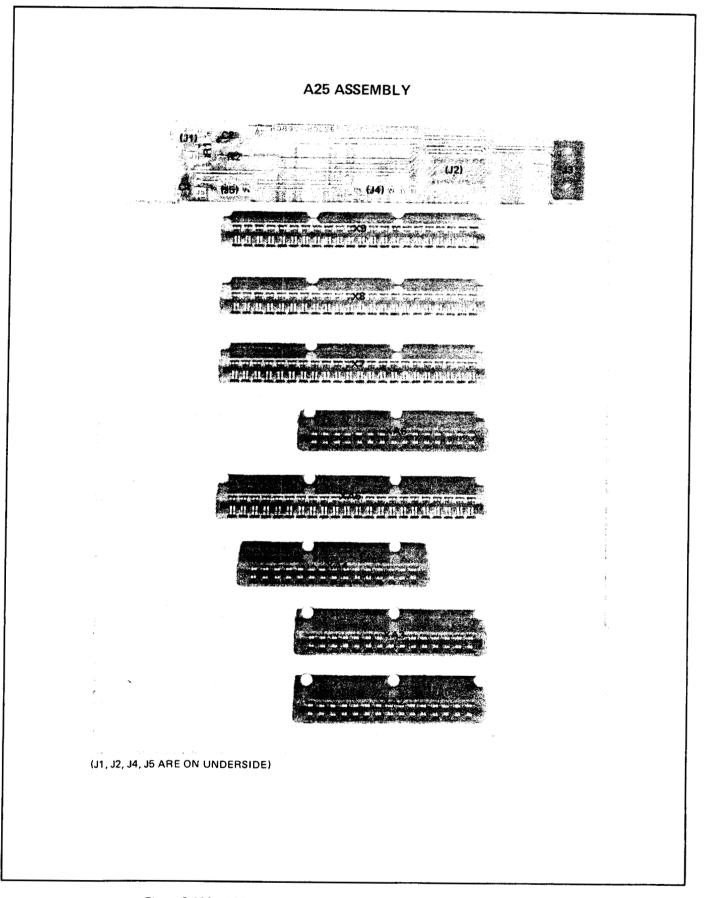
A25 Audio Motherboard Assembly Component Locations
